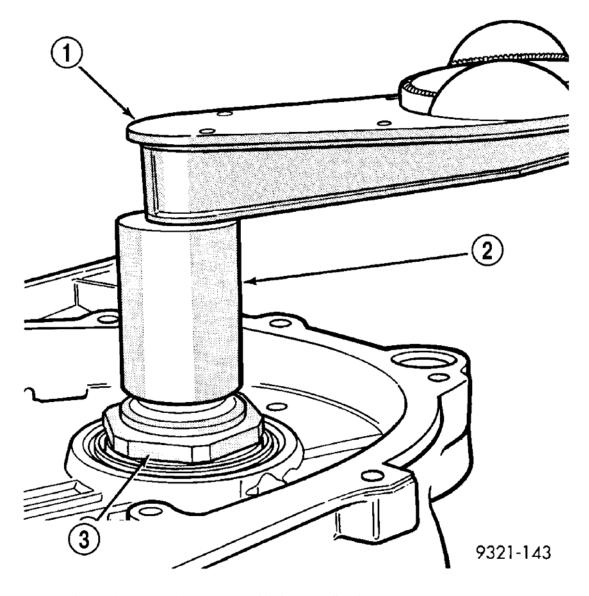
Checking Turning Torque Of Output Shaft Courtesy of CHRYSLER LLC
